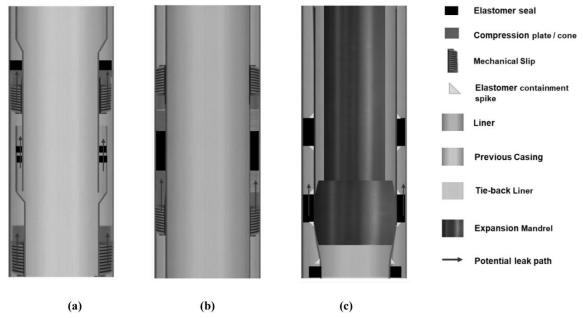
Differences among (a) liner top packer assembly, (b) integral liner hanger seal, (c) expandable liner hanger seal assembly.
